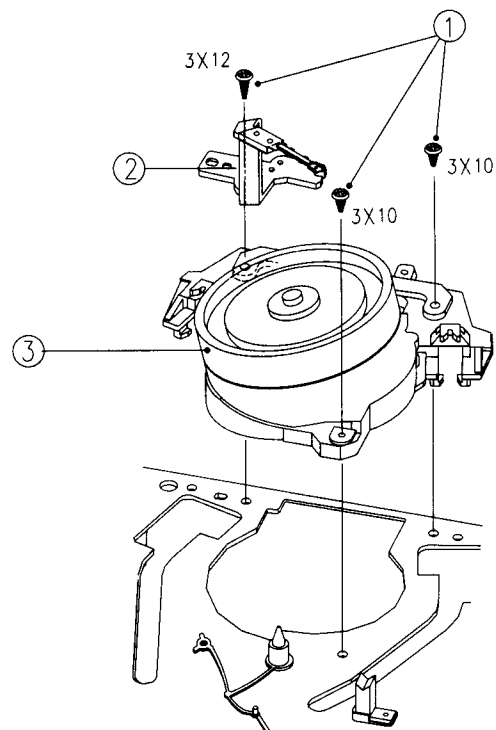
ASSEMBLY OF THE F/L ASS'Y
